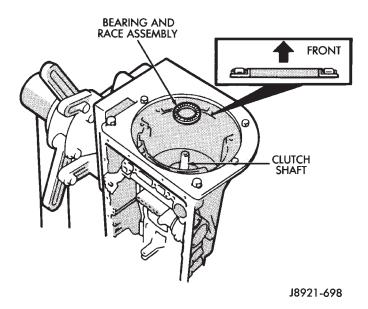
Installing Clutch Shaft Thrust Bearing And Race Assembly
